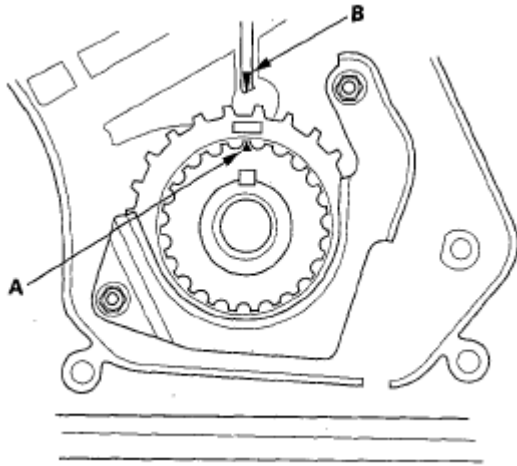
Identifying TDC Mark On Tooth Of Timing Belt Drive Pulley With Pointer On Oil Pump
